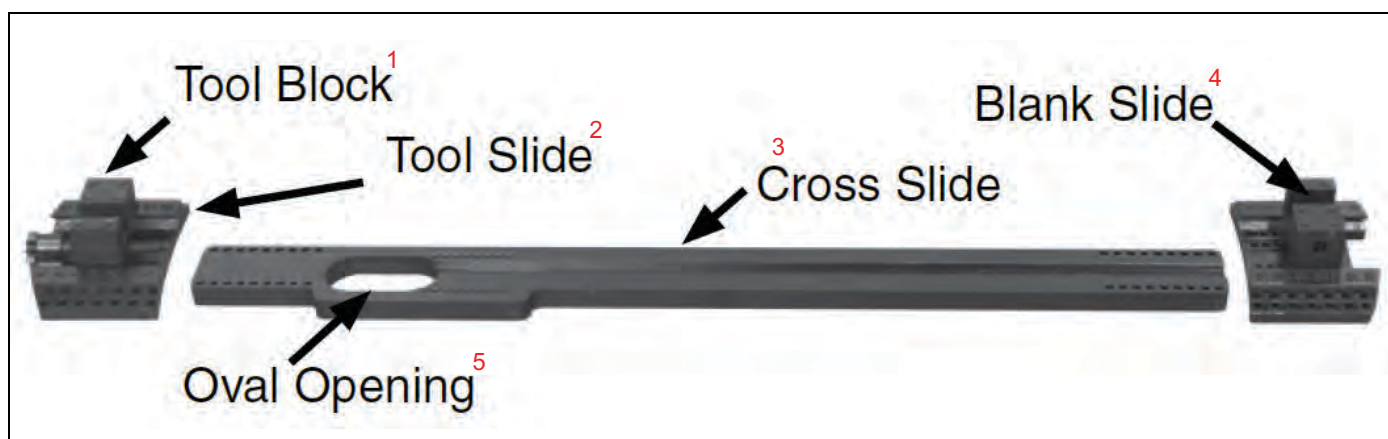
TOOL SLIDE AND CROSS SLIDE
